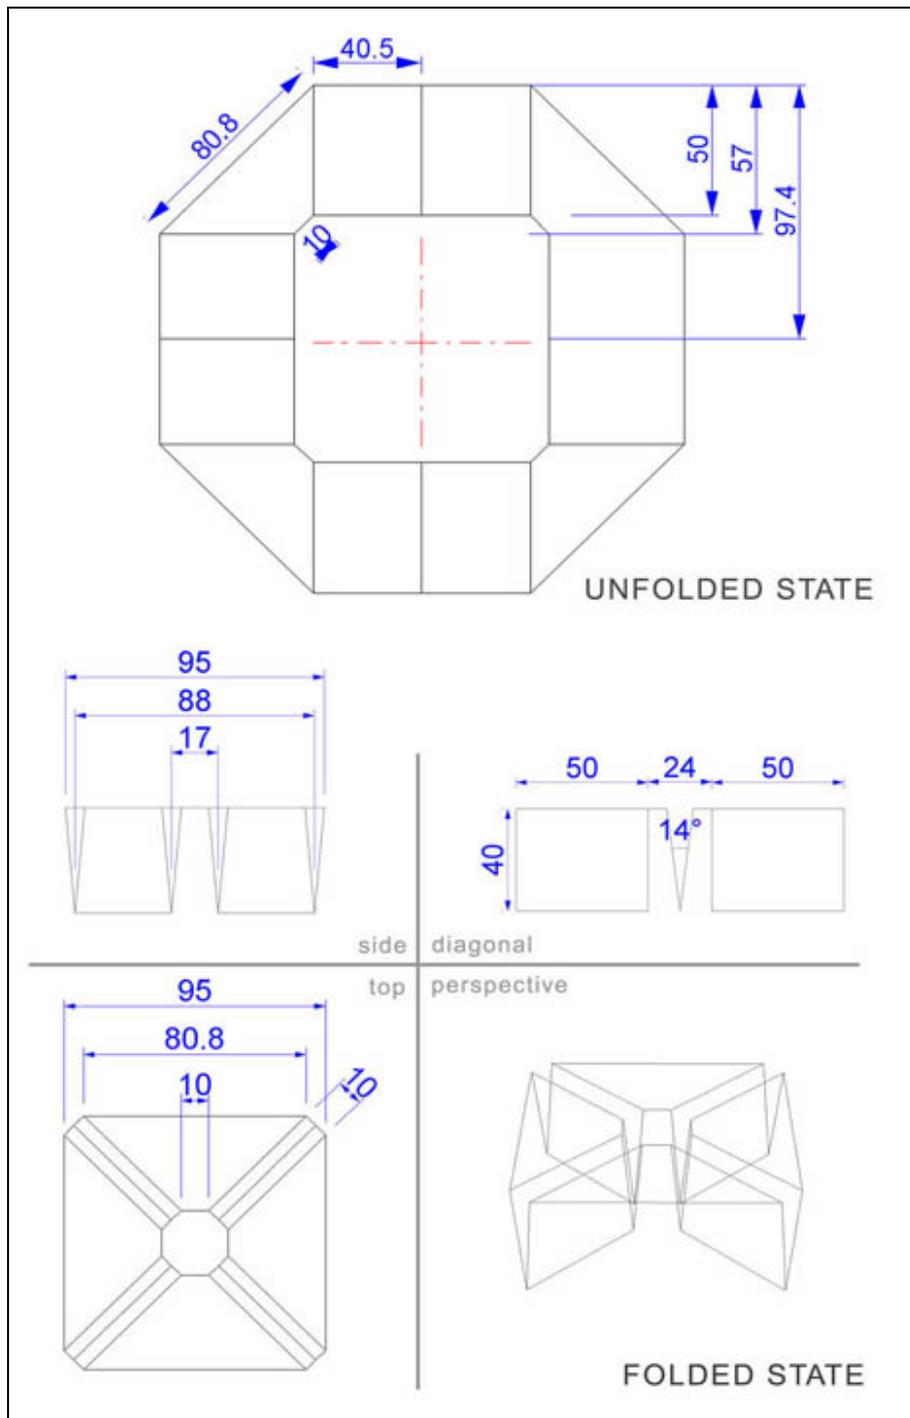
Technical Drawings Of Base (measures: mm, scale: 1/20)
